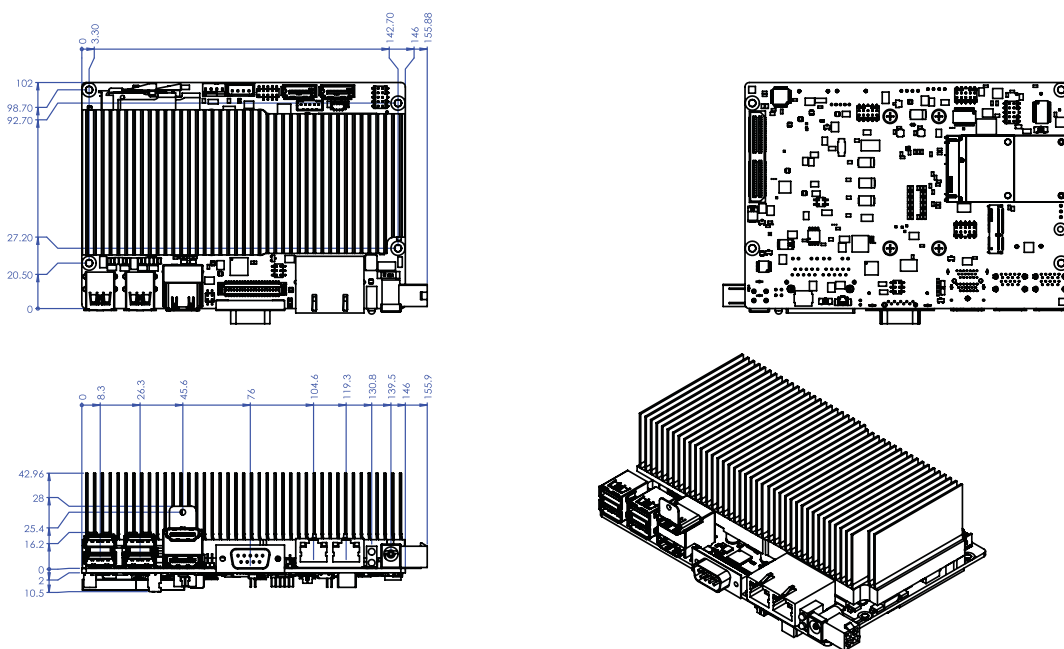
MIO-5391 Mechanical Drawing (with Heatsink)
